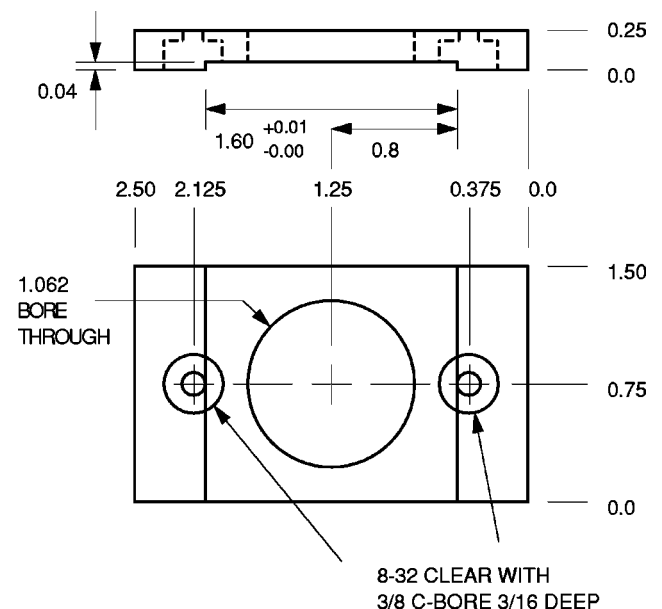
SPCM front adapter plate. Units: inches, all tolerances are  $\pm 0.01$  in. unless otherwise specified.
